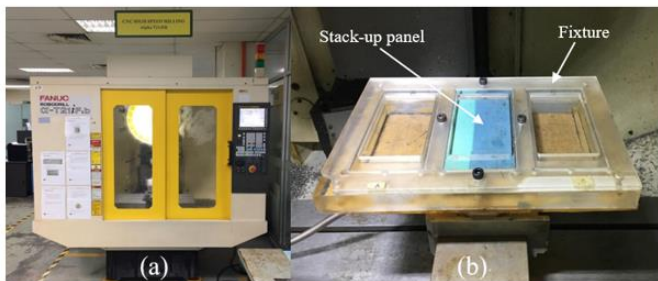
(a) CNC machine (b) Stack-up panels in the fixture.
